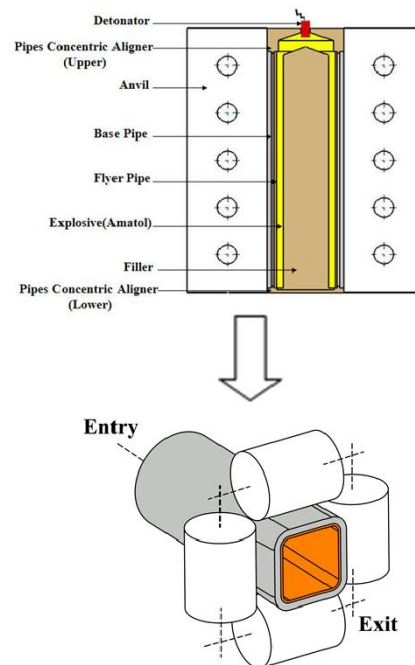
Schematic view of the explosive welding and shape rolling process.
